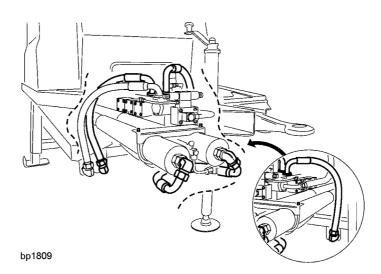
Rod-side pressure on the machine see ("Technical data for SP 1800 / 2800 CAT" on page 29).
